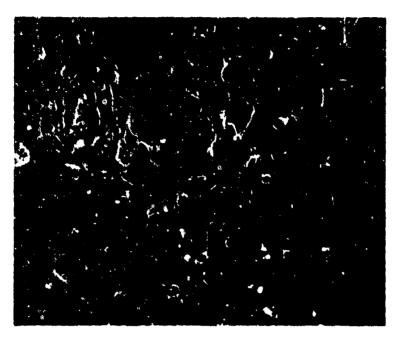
Quasi-cleavage fracture in a 17-4PH fatigue specimen aged at 482°C, 1000x.
